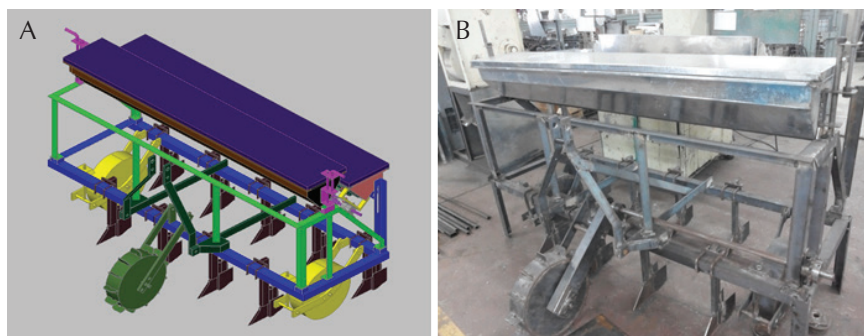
(a) 3D view of the 9-row zero till planter and (b) fabricated prototype.
